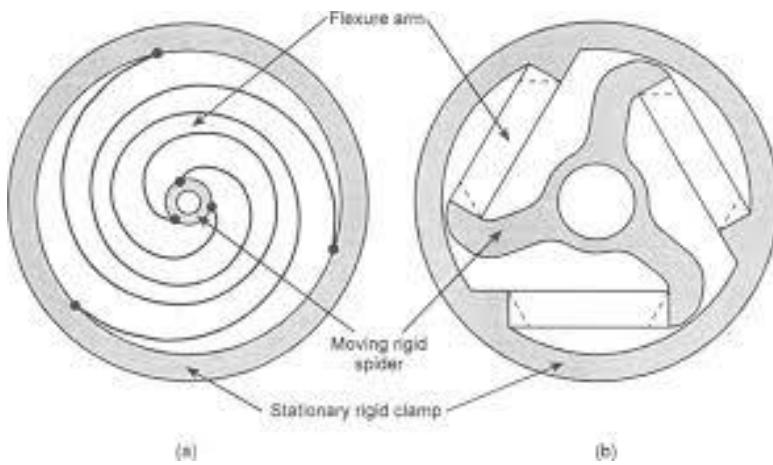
(a) Oxford flexure bearing (b) Triangular Flexure bearing
